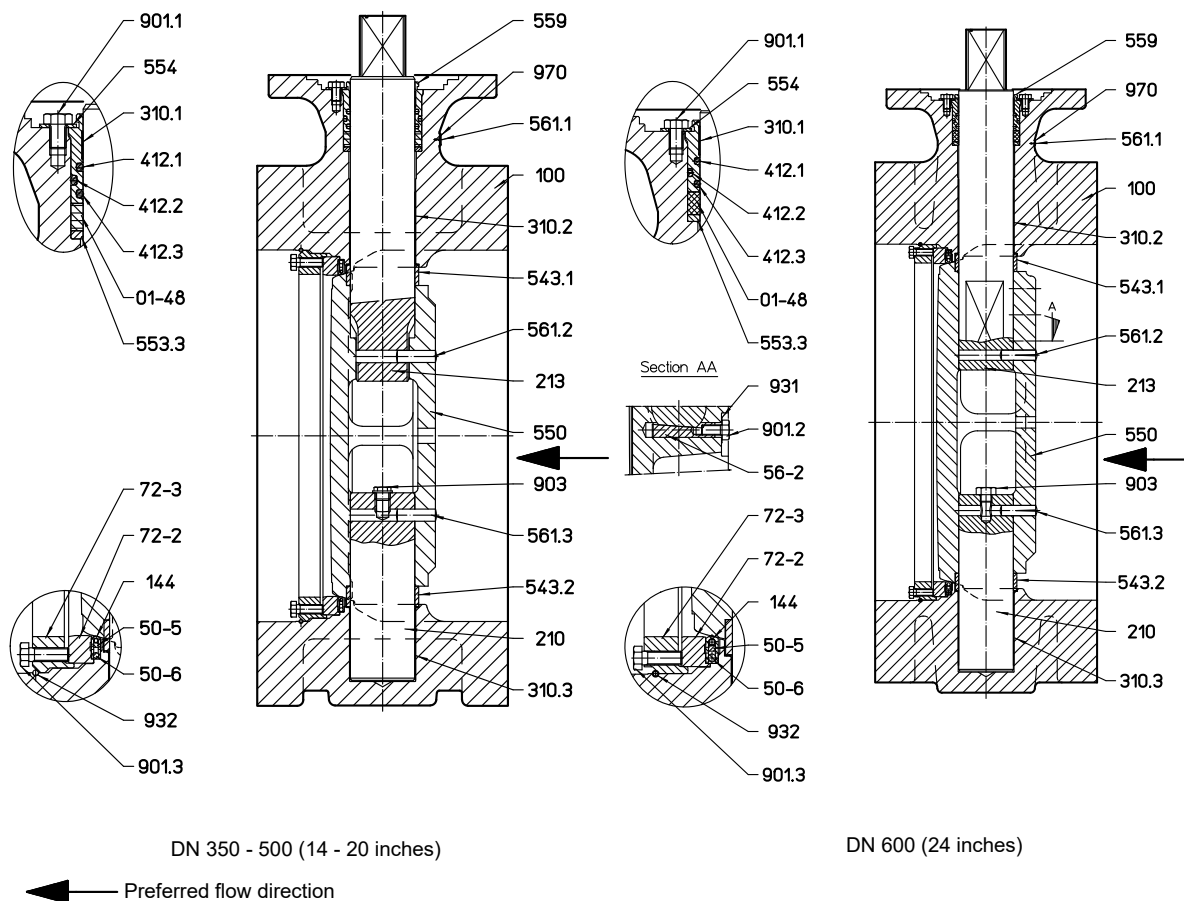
Sectional drawing of DANAIS MT II DN 350 - 600 (14 - 24 inches) / flanged body (T7) / plastomer design
